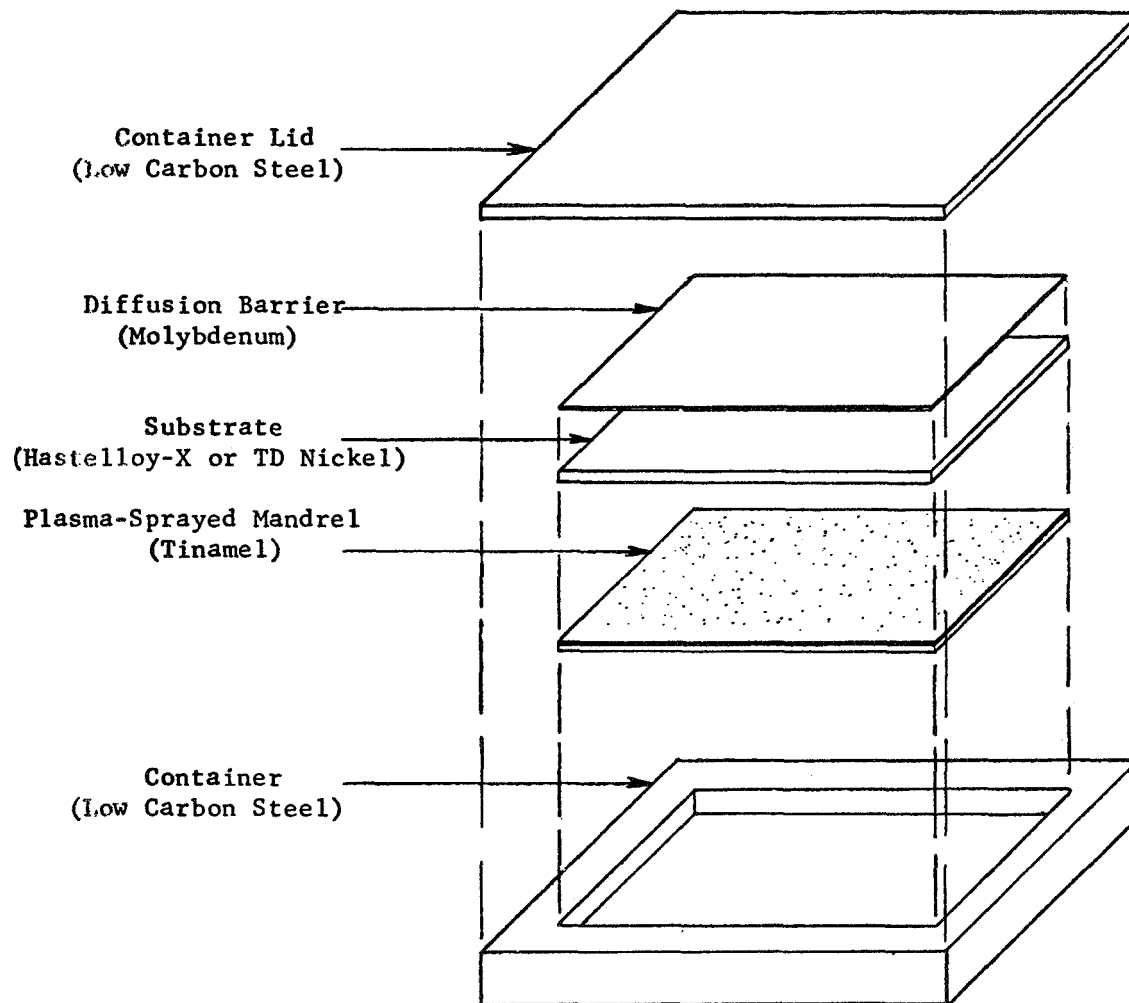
ASSEMBLY SKETCH FOR OXIDE-COATING SPECIMENS
